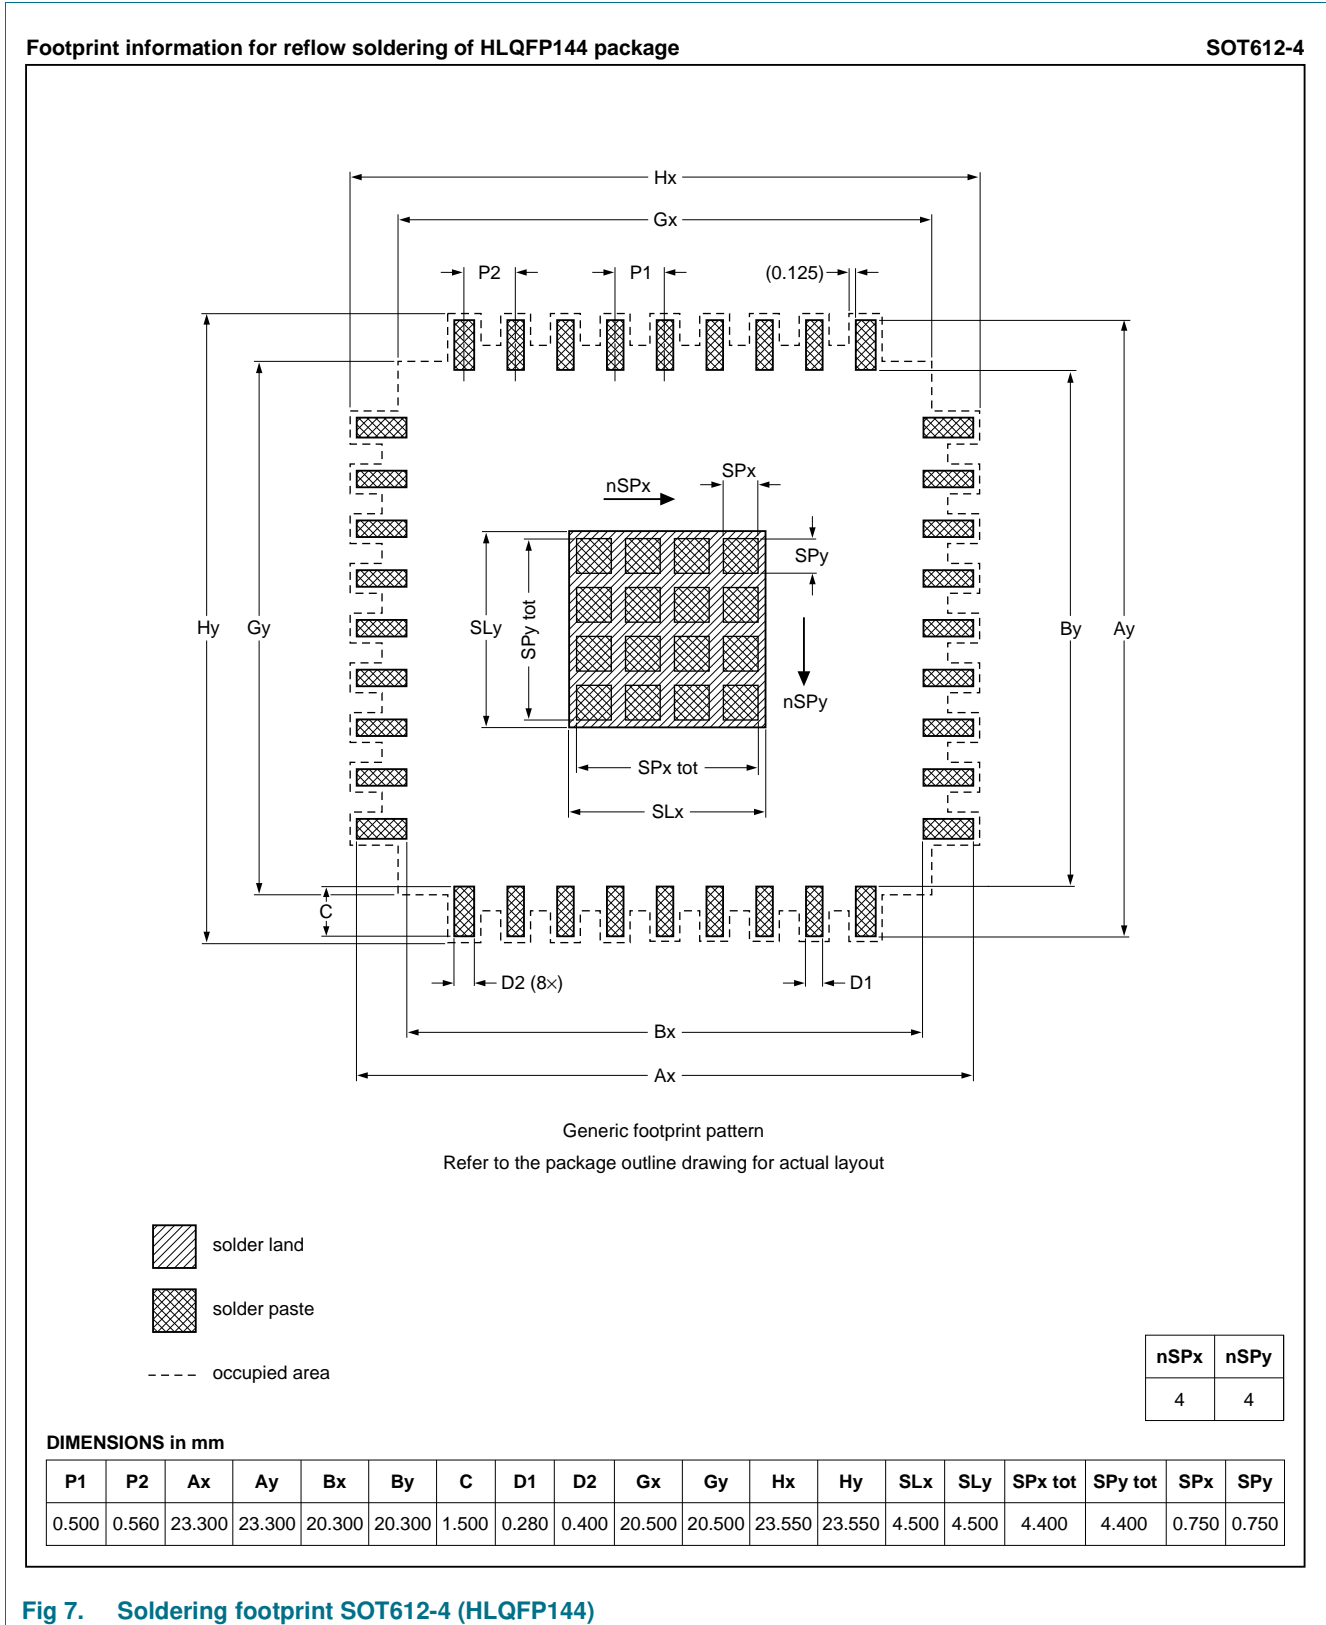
Soldering footprint SOT612-4 (HLQFP144)
